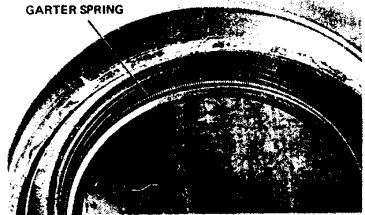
Timing cover lip-type oil seal with garter spring tension.
